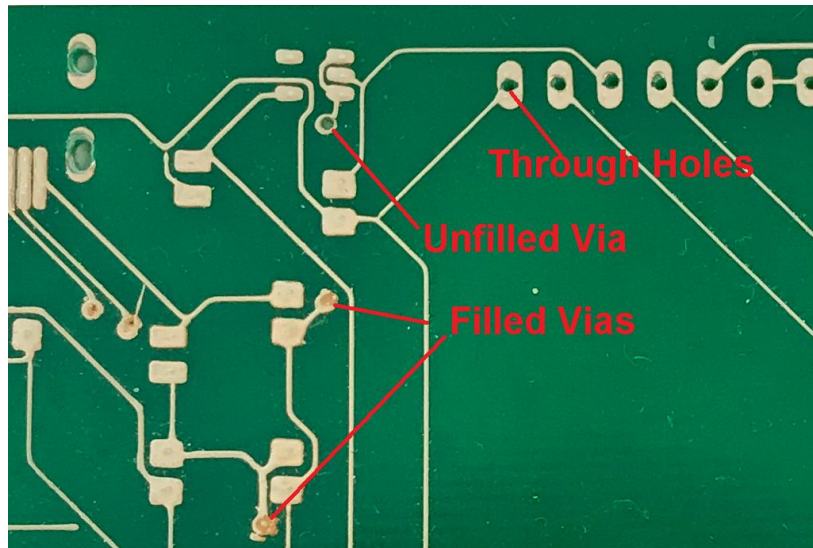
Image of filled vias, unfilled vias, and open through-holes on 3D-PCB
